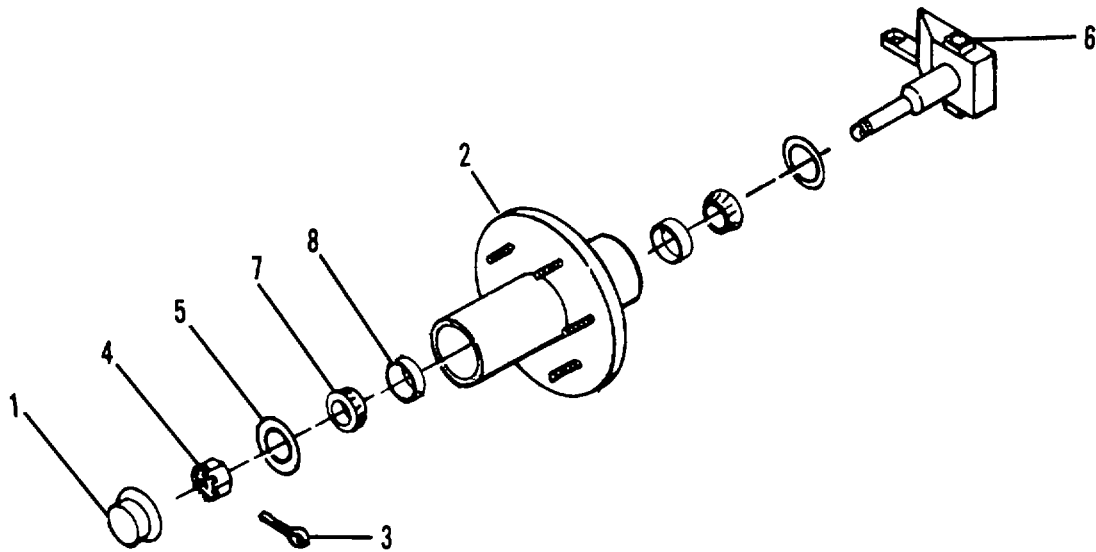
Steering Wheel Hubs and Bearings (Sheet 2 of 2).
